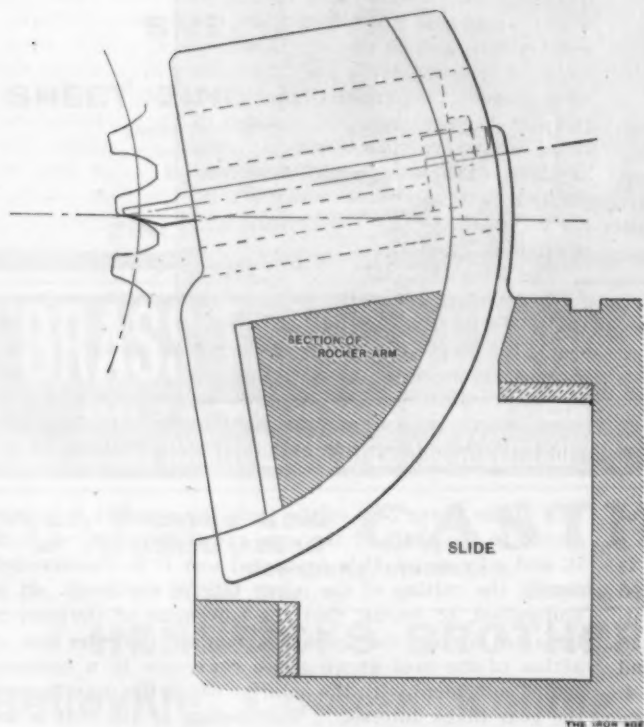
Section of the Rocker Arm, Showing the Position of the Tool in Cutting.
